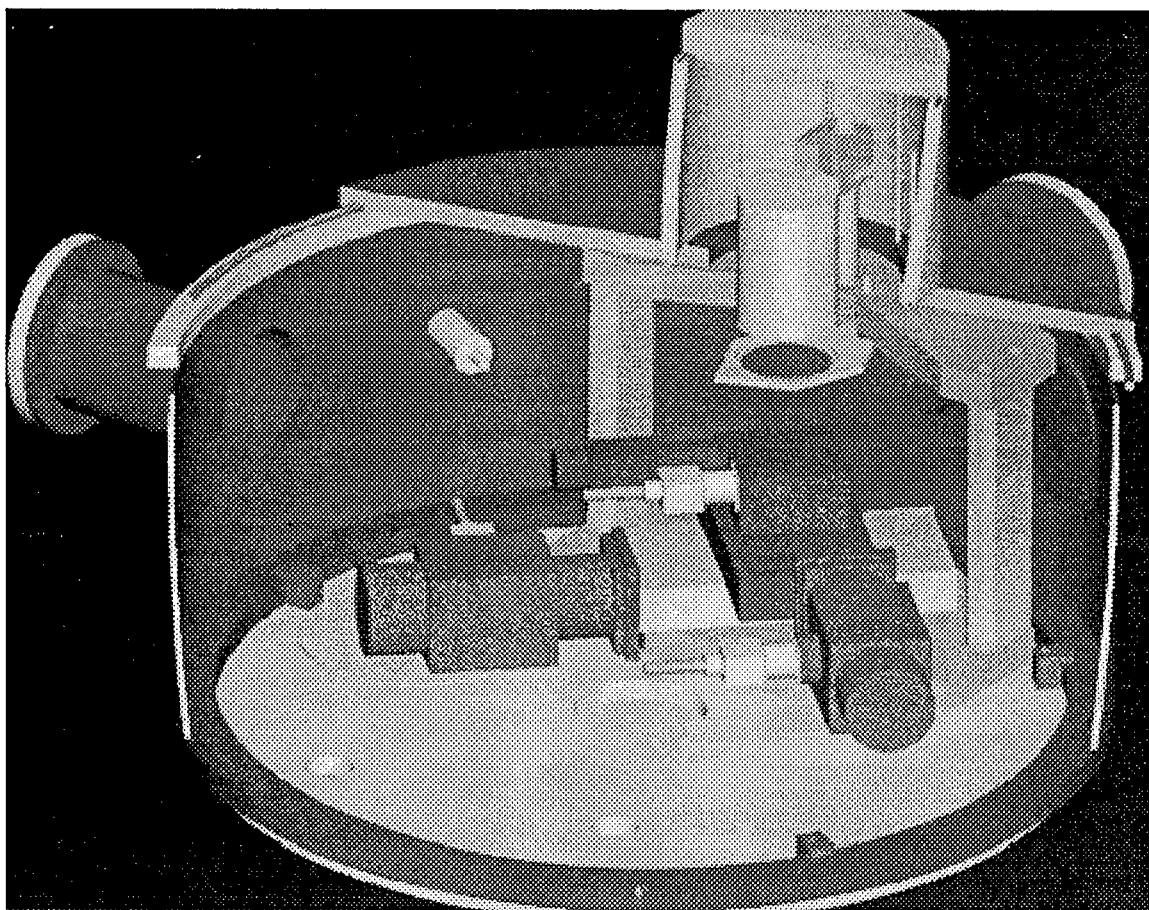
Solid model of the ion figuring system components. The ion source is supported on two posts above the translation and rotation stage assembly. These components are housed in a 1 meter diameter, cylindrical vacuum chamber.
